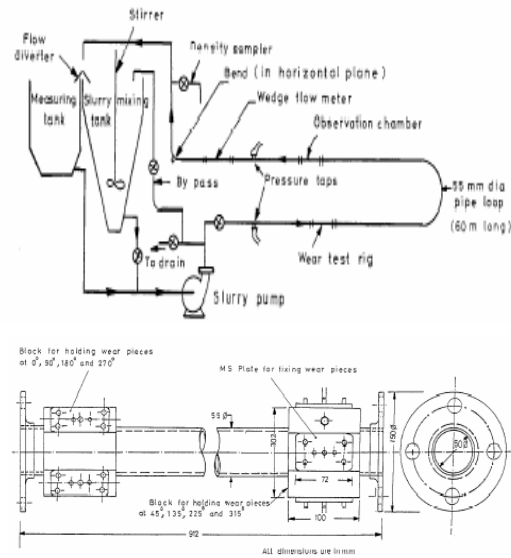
(a) Schematic diagram of pilot plant (b) assembled view of test specimen fixture (Sehadri et al., 1995)
